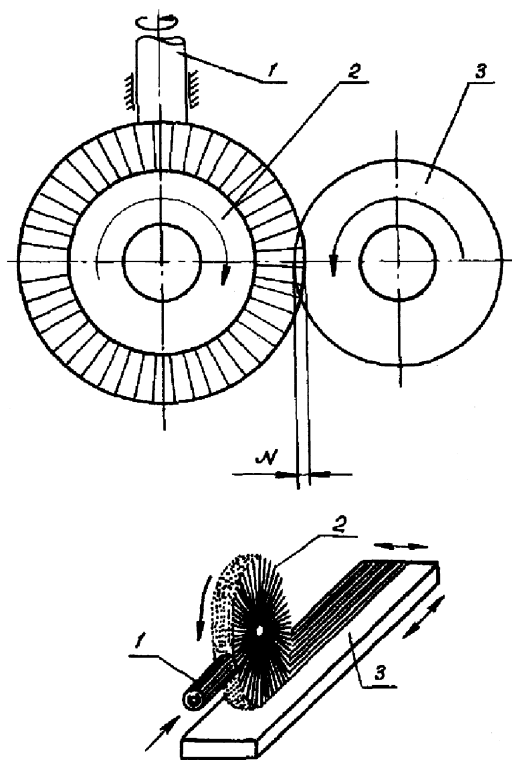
Scheme of the friction cladding process (top, for cylinder-shaped specimen; bottom, for plane-shaped specimen): (1) Part of the clad material; (2) the tool with flexible elastic elements (RMB); (3) the processed product; (N) tightness (displacement of the tool, in mm, onto the processed product).
